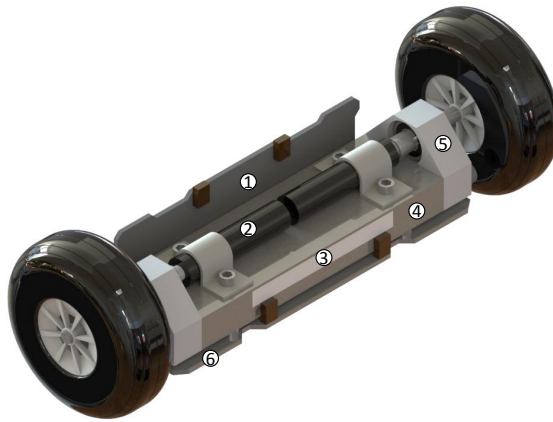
Solidworks CAD model of the robot. Inner parts: (1) side PCB, (2) DC motor, (3) battery, (4) chassis (IB), (5) bearings, and (6) bottom PCB.
